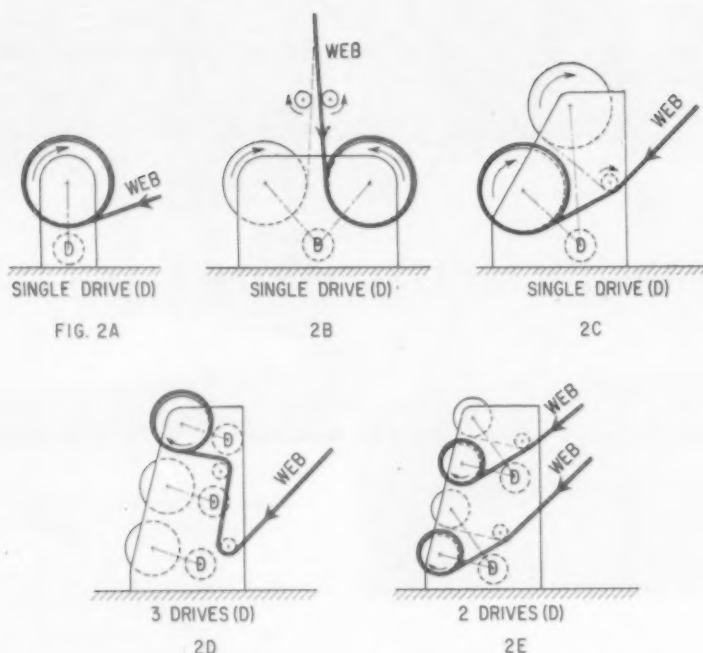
Schematic diagrams of center winding machines. Torque is applied to the roll being wound. Drawing A is a single shaft machine; B is a horizontal 2-shaft machine; C is a staggered 2-shaft machine; D is a staggered 3-shaft machine with individual drives for each shaft; and E is a staggered 4-shaft machine.
